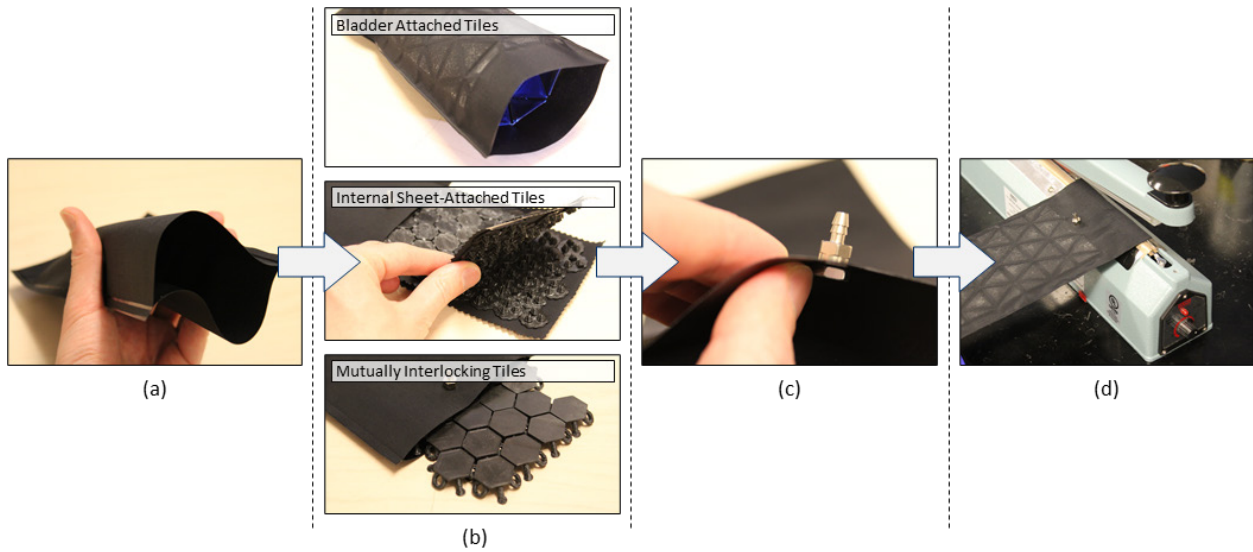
Bladder fabrication process. (a) Three edges of two layers of TPU coated nylon fabric facing each other are heat sealed using a linear impulse sealer, forming a pouch. (b) While two opposing layers of internal sheet-attached tiles and a layer of mutually interlocking tiles are placed inside these pouches, the fabric permanently accommodating bladder-attached tiles is used to form a pouch. (c) A low-pressure barbed pneumatic fitting is attached to one of the bladder surfaces near the opening of the pouch with a rubber washer and a hex nut through a 1/8-inch punched hole. (d) The remaining open edge of the bladder is heat sealed using the linear impulse heat sealer, forming an airtight pneumatic textile prototype.
